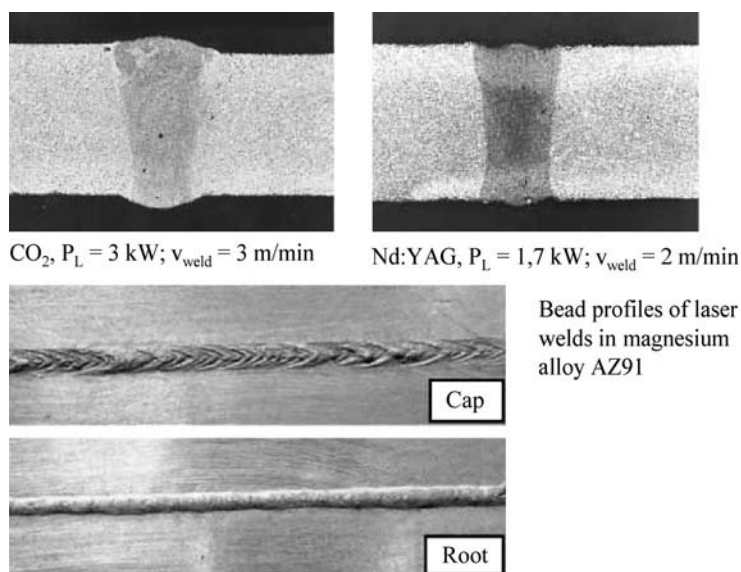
Laser beam welding: cross section and bead profiles
